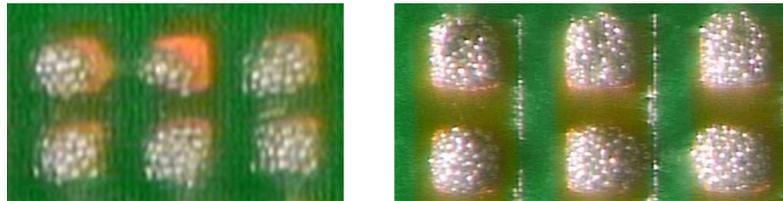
Left picture is Type 4 paste, right picture is Type 5 paste after printing.
